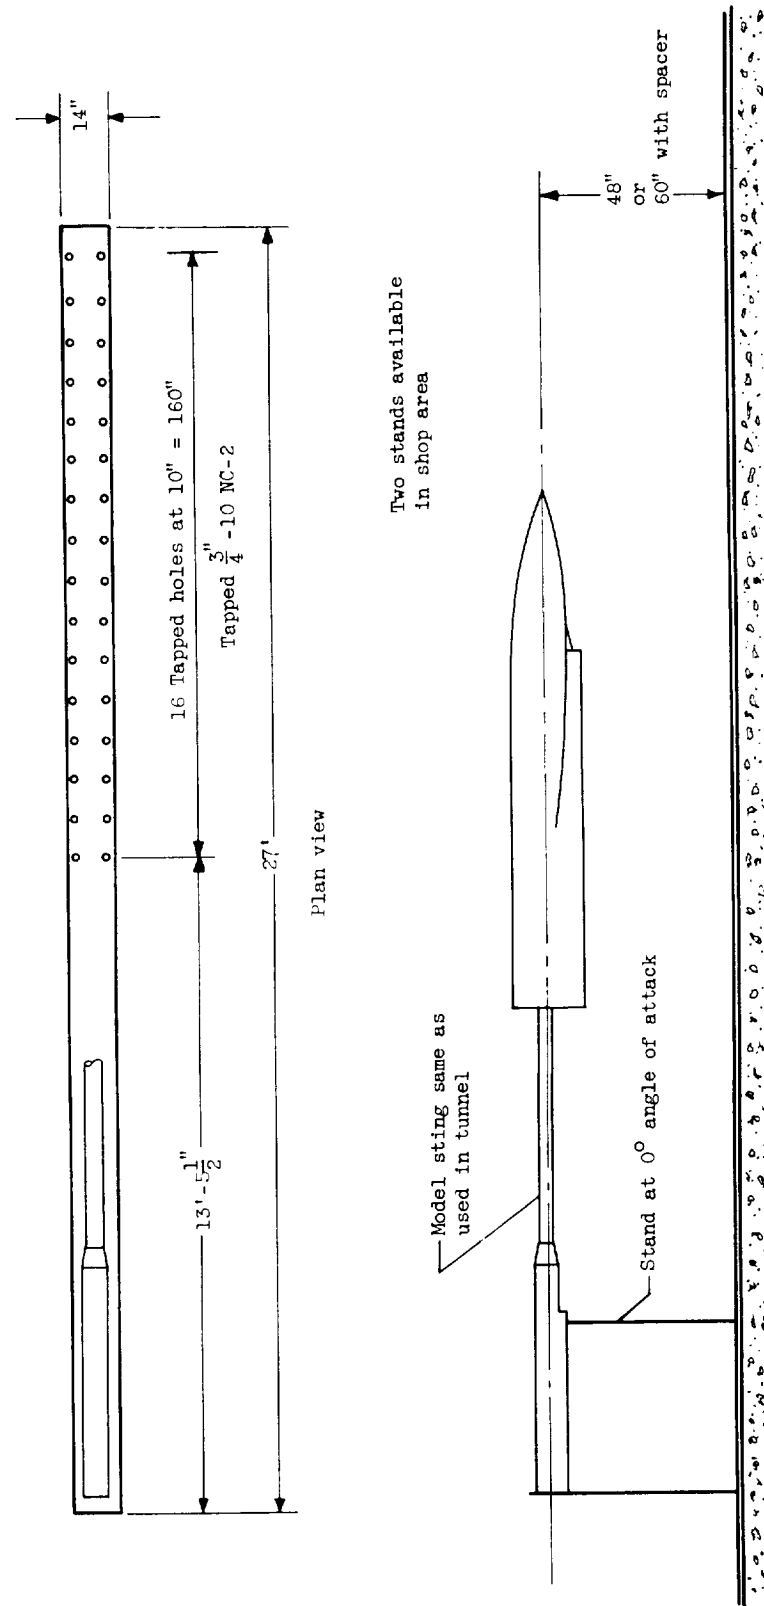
Shop stand for sting-mounted models, Lewis Unitary Plan Wind Tunnel.
